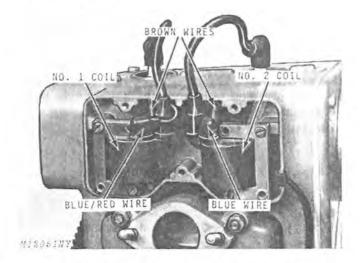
Replacing Ignition Coils (Kohler Engines)
